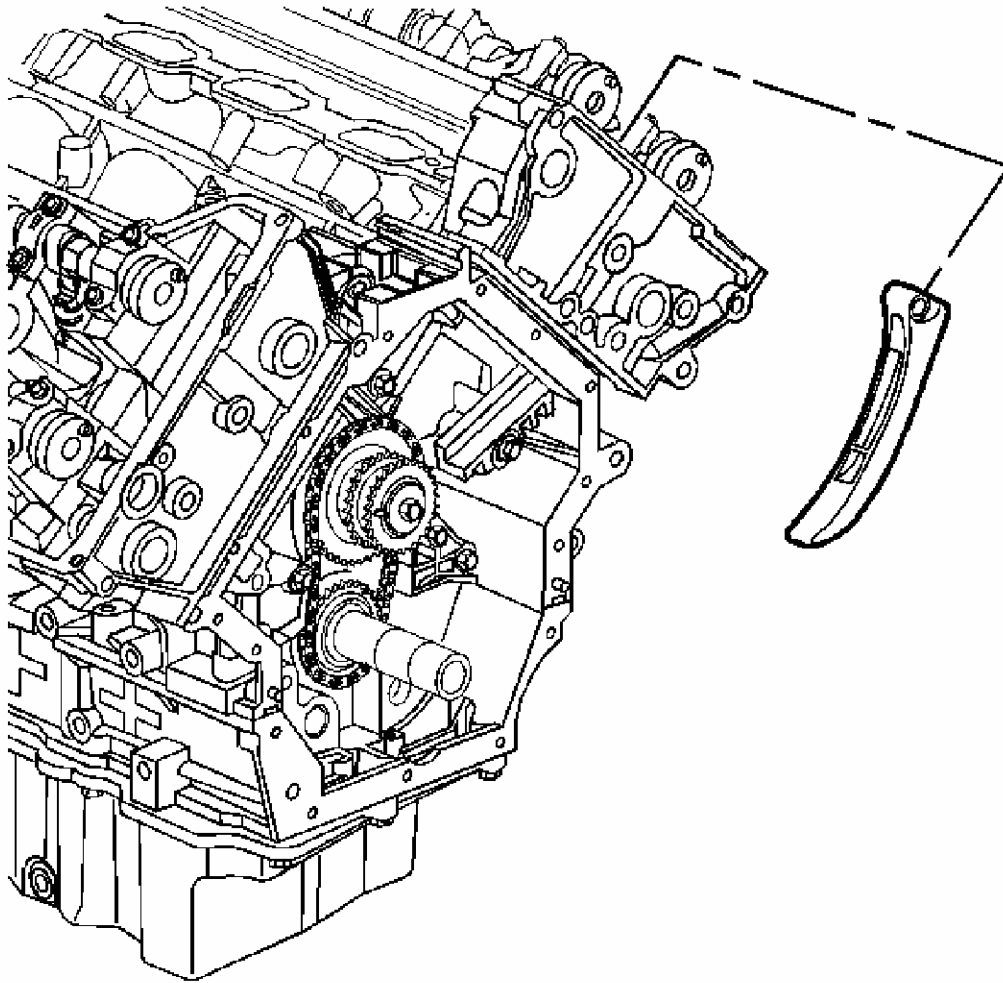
View of Left Secondary Camshaft Drive Chain Shoe
